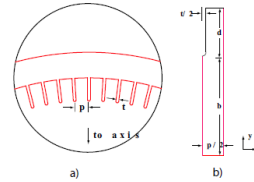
a) detail of the grooved vacuum chamber wall; dimensions shown are period p and fin thickness t ; b) detail of the grooved vacuum chamber wall; dimensions shown are period p and fin thickness t .
